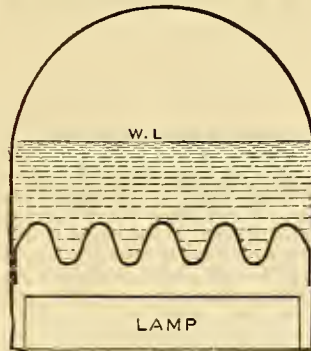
HORIZONTAL BOILER IN SECTION. shaped between wooden moulds. These types will be found to work very well. If the boiler is comparatively large in dia-
